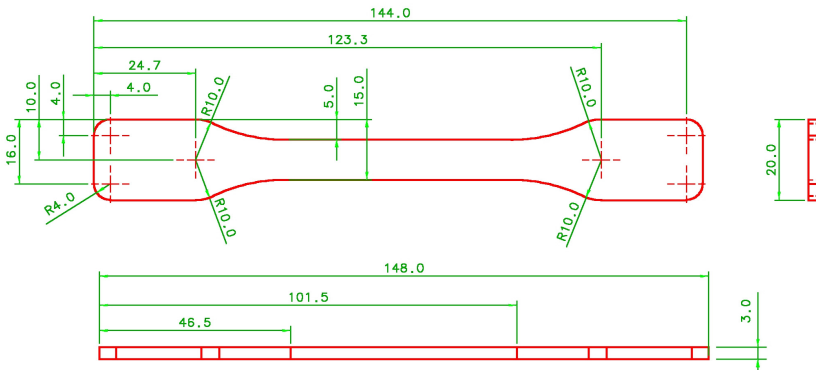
Specimen geometry and dimensions, in millimeters.
